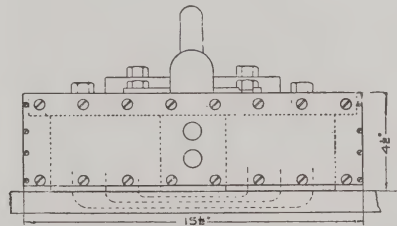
END VIEW OF MULTIPOLAR LIFTING MAGNET.
